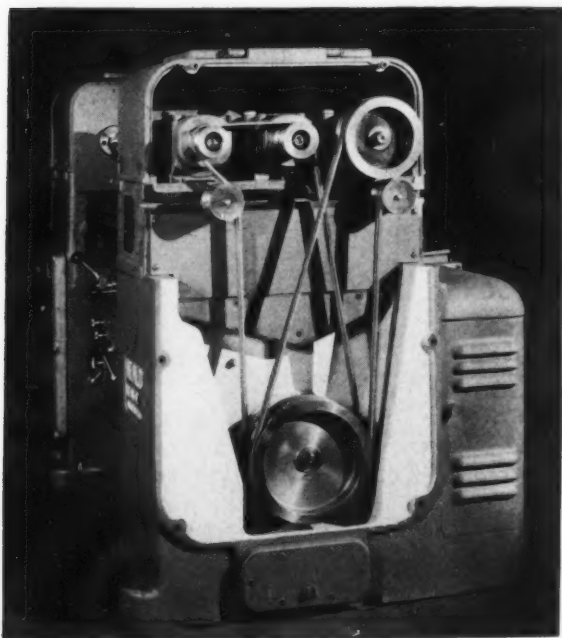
Mainshaft is connected to tool spindles through V-belt drive, with adjustable take-up idlers
